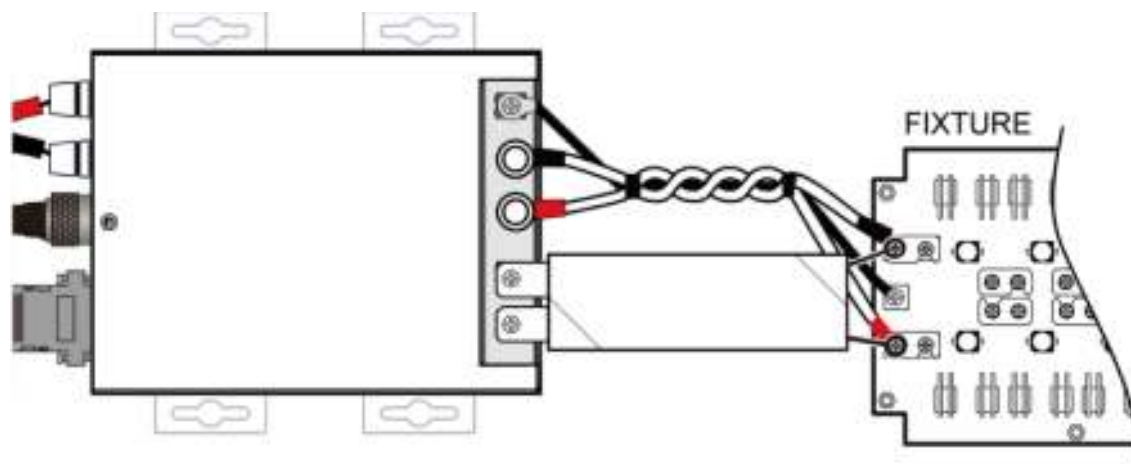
Connection Illustration of External Box and Fixture A118029
